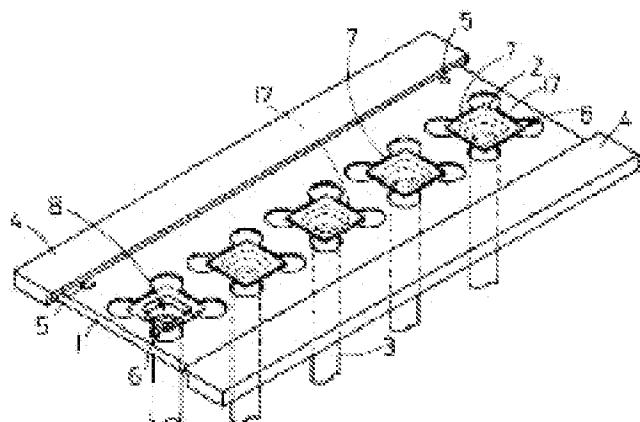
An explanatory view that shows the flow of the work in an automatic ball mounting apparatus
